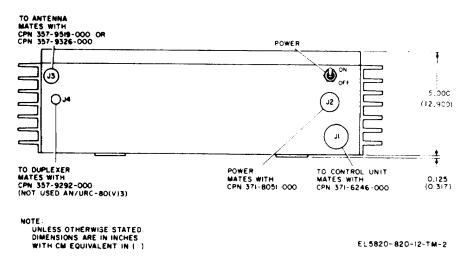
Radio Receiver Transmitter RT-1061/URC-80[V] installation drawing.
